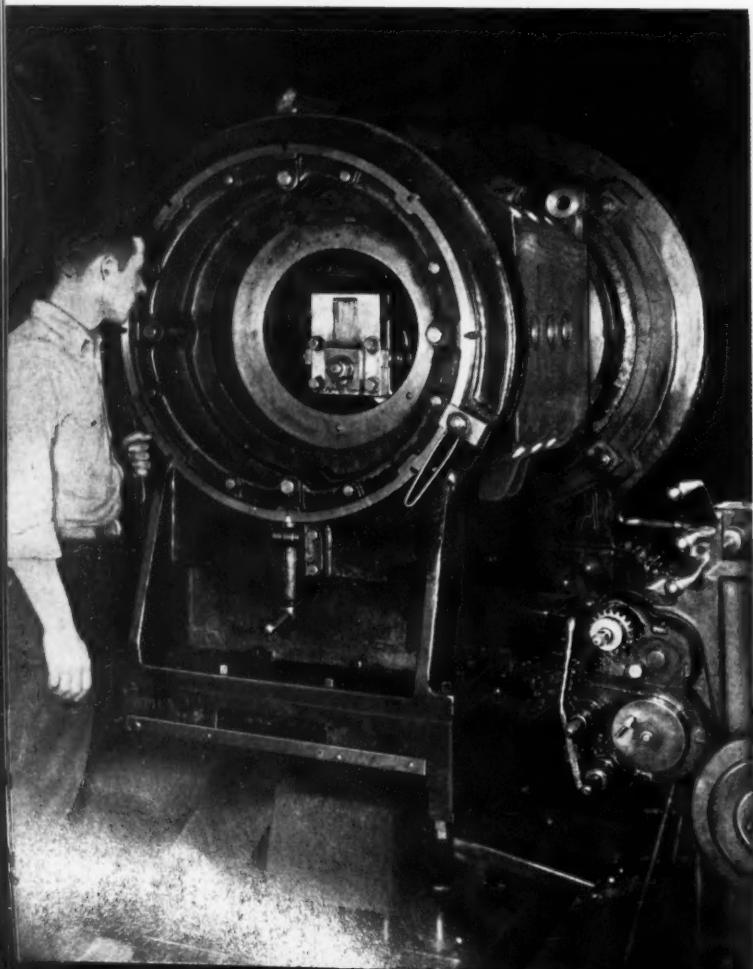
Planing Four Motor Frames for Diesel-electric Locomotives on a Planer Equipped with a Special Head for the Finishing of Angular Surfaces
